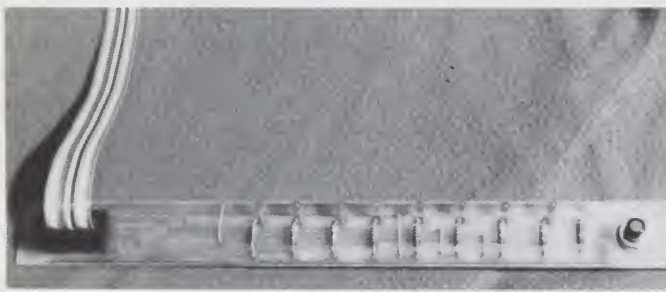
Ribbon cable feeds LED panel to be used for PNG-PNG (see text). "Quickie" PC board holds minimum of circuitry to drive LEDs.
